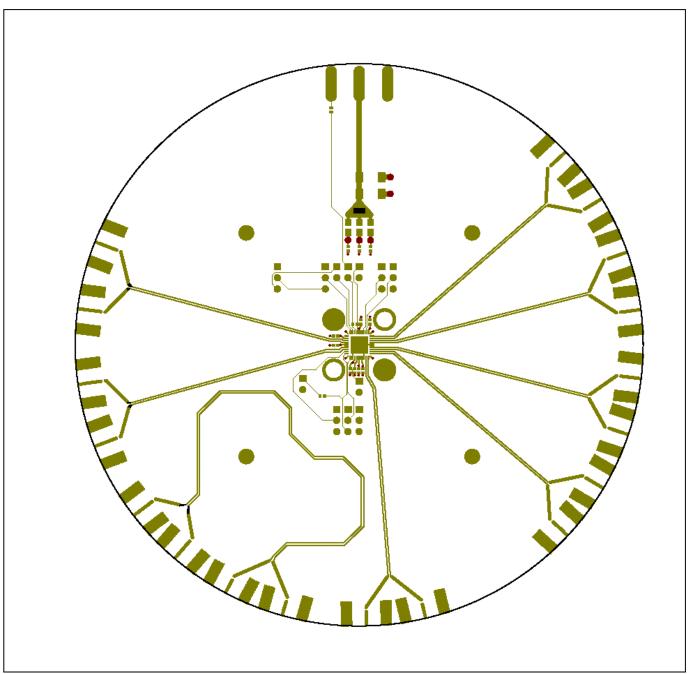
MAX3882 EV Kit PC Board Layout-Component Side
